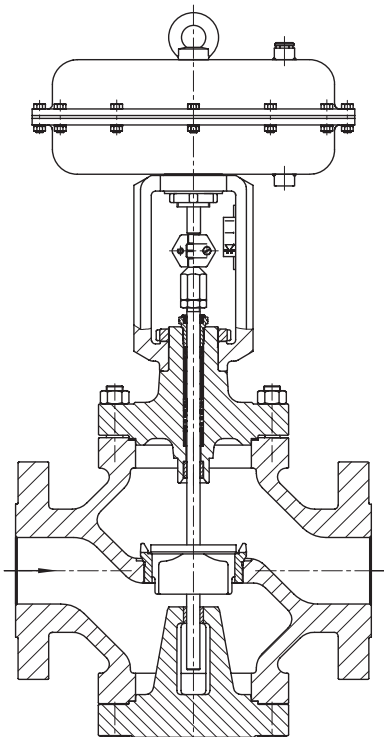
· Type 3254-1 Control Valve with Type 3271 Pneumatic Actuator
